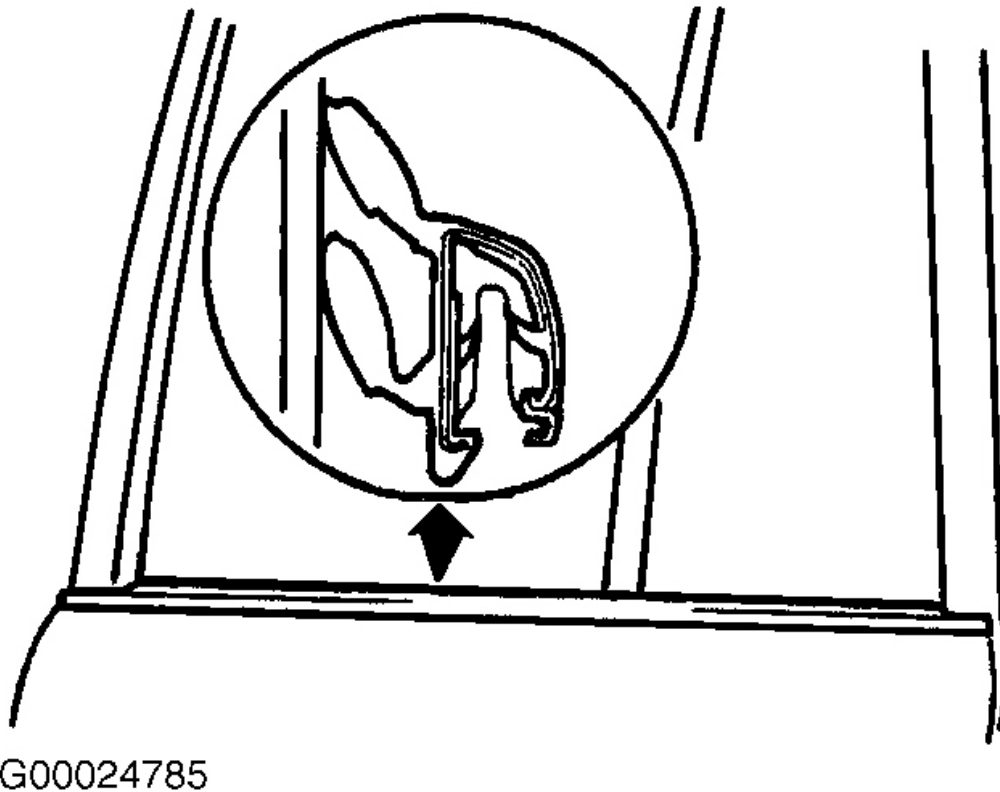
Identifying Rear Door Molding Attachment Points (Land Cruiser)
